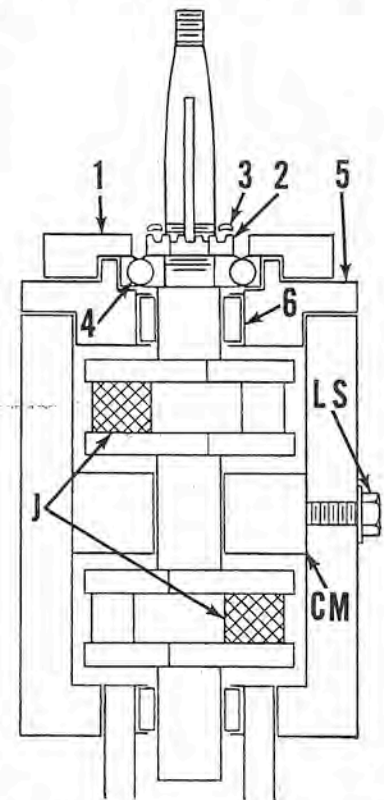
Schematic view of crankcase showing method of removing and installing crankshaft. Refer to text.
